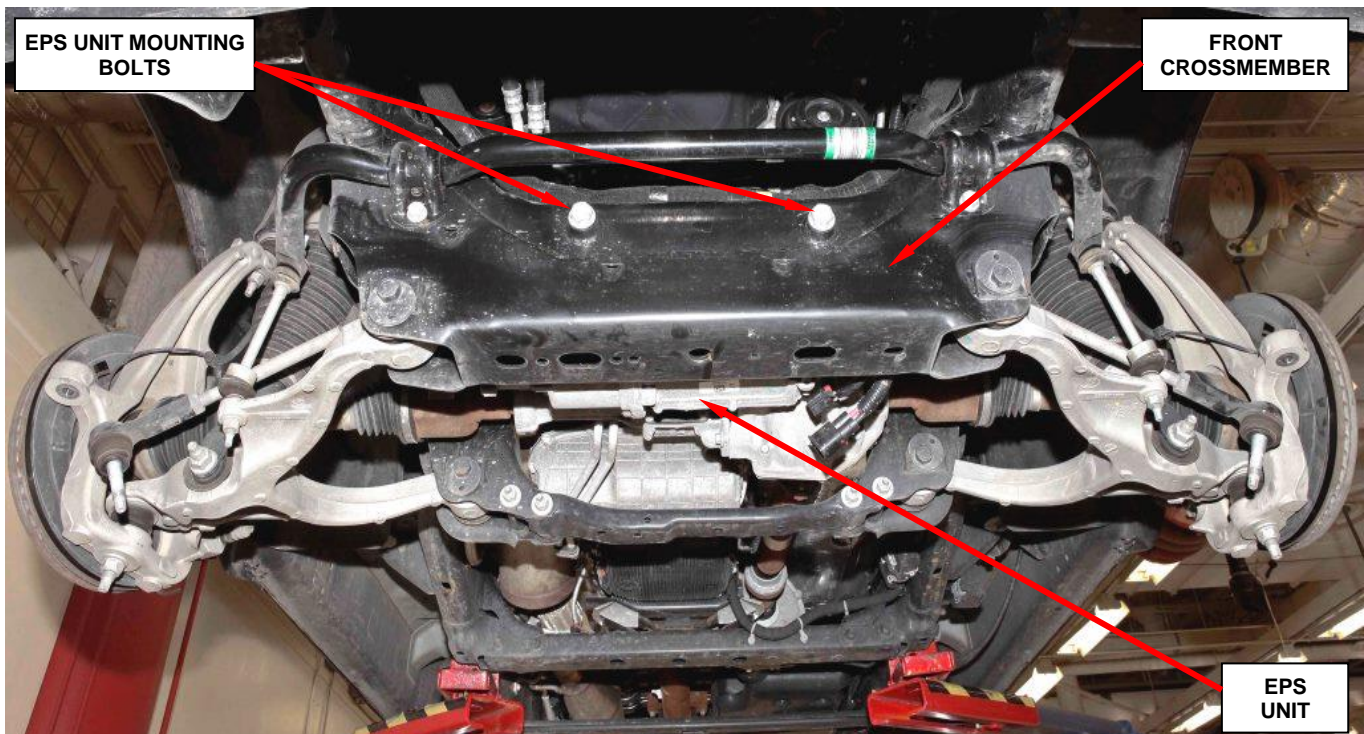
Electric Power Steering Unit Mounting Bolts (4x4 Shown)
